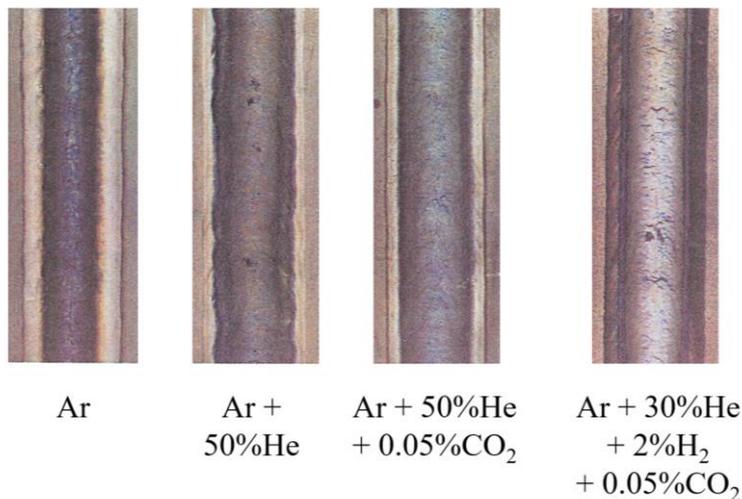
Weld appearance with various shielding gas compositions used (Lukkari, 2006).
